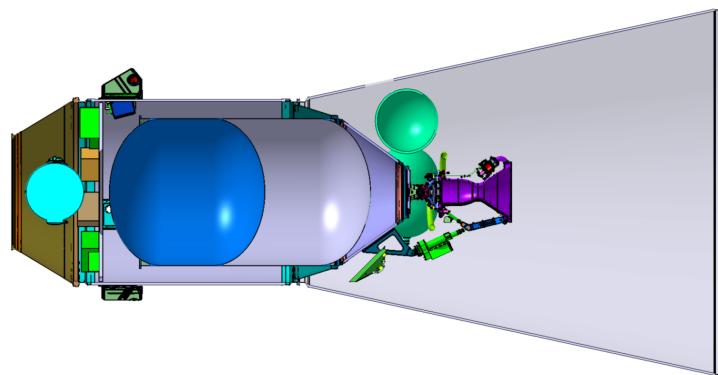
Section cut drawing of the upper stage, 2-stage launcher
